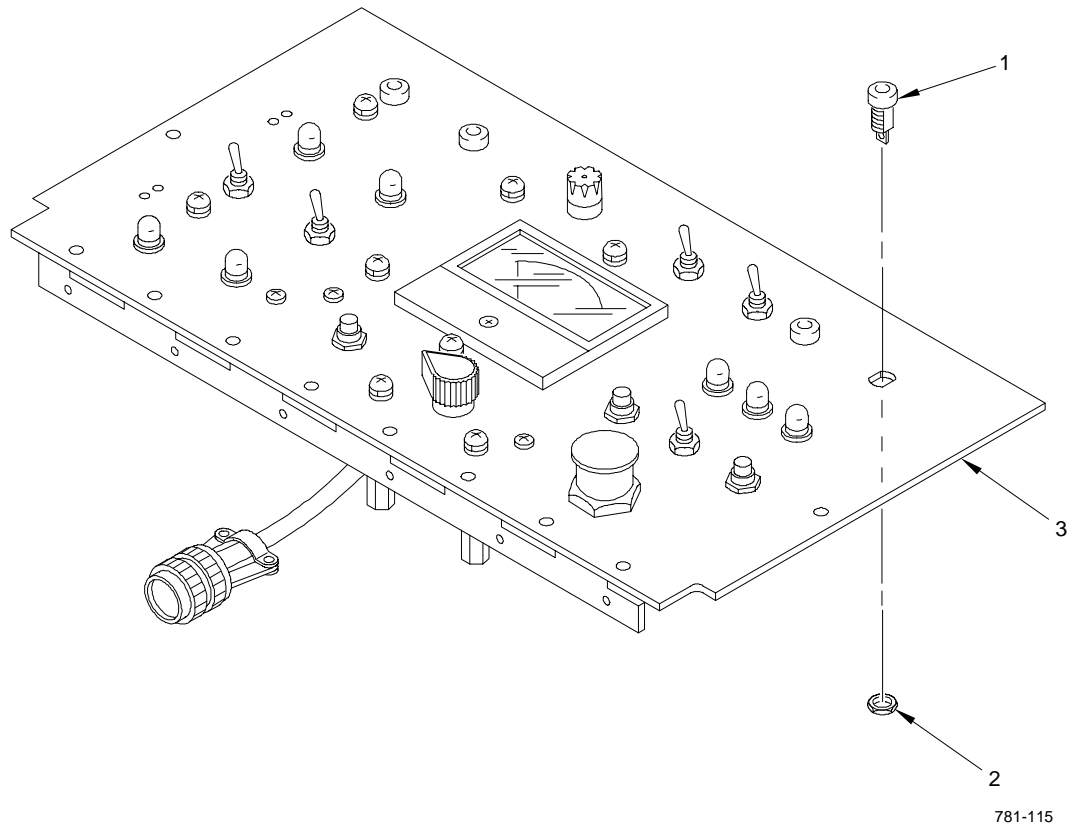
Test Points 1A1TP1 thru 1A1TP4
